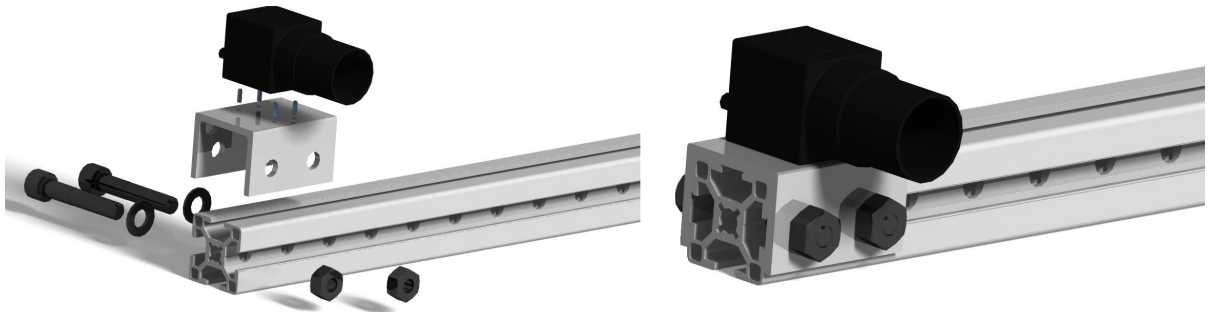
Stereo Camera Fixing and Assemble Project - render.
